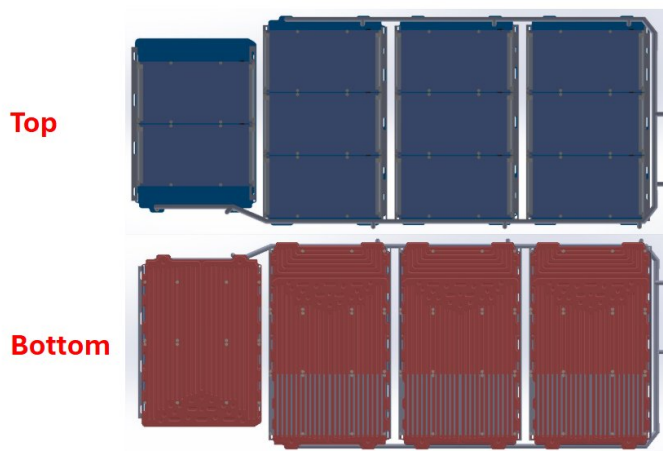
Full pack thermal management layout: top view showing module housings (blue), bottom view showing cooling plate channels (red) routed across all 11 modules.
